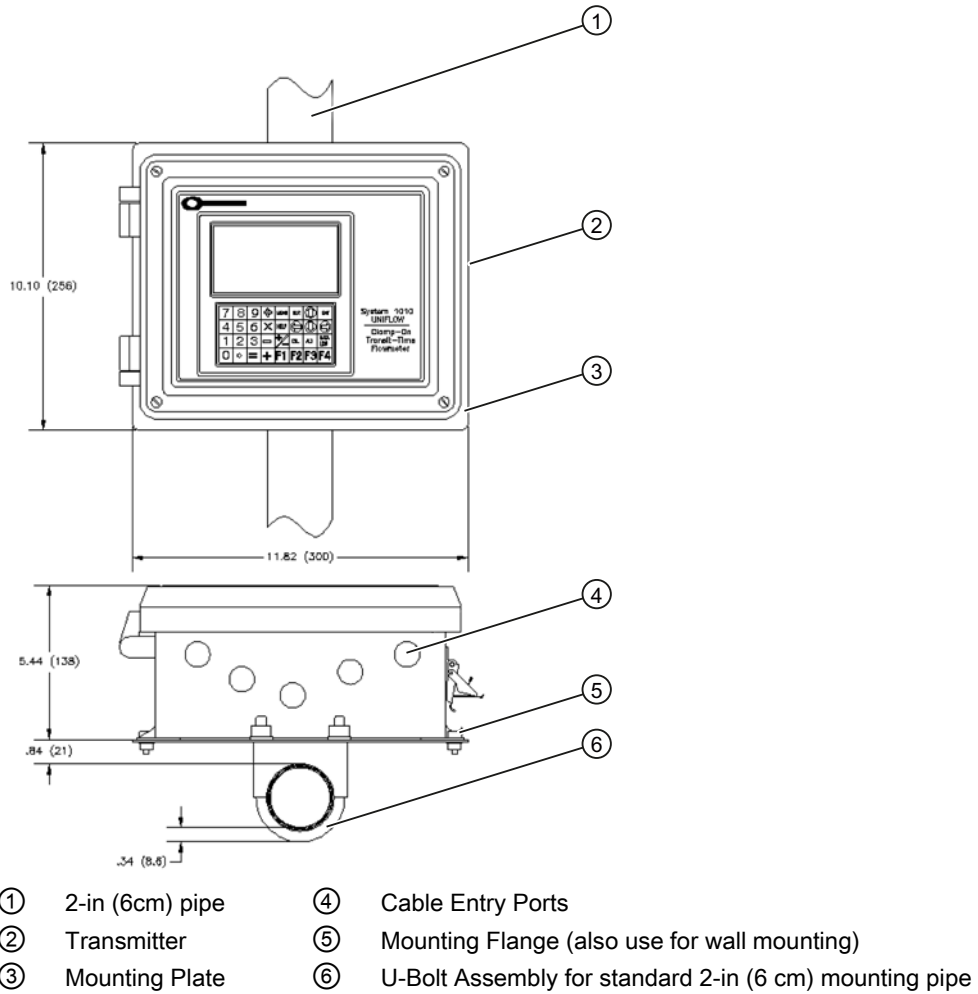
Pipe Mounting and Mounting Locations for Transmitter
